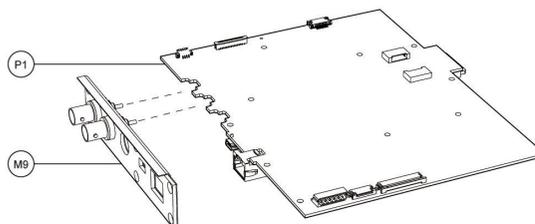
Assemble the CONNECTOR BRACKET to the MAIN BOARD PCB
